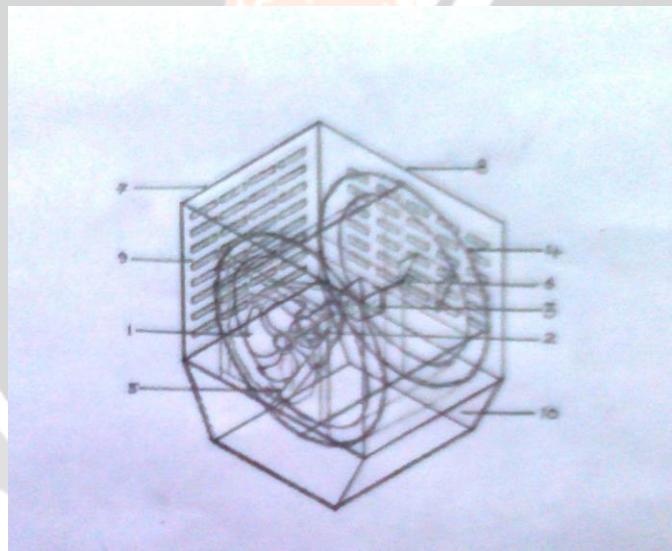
Line Diagram of Pump Less Air Cooler (Description:1.Fan, 2.Motor, 3.Speed Reduction Gear Box, 4.Outer Drum, 5.Inner Drum,6.Bearing,7.Side Panel,8.Back Sheet,9.Front Sheet,10.Tank)
